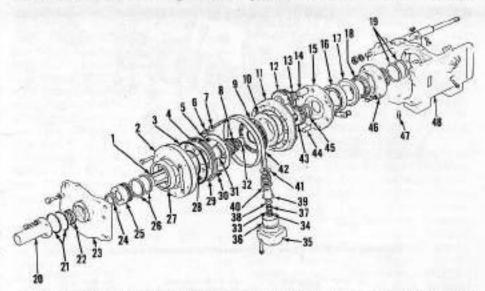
Exploded view of front planetary assembly of power shift transmission. See Fig. 163 for view of rear planetary assembly.
